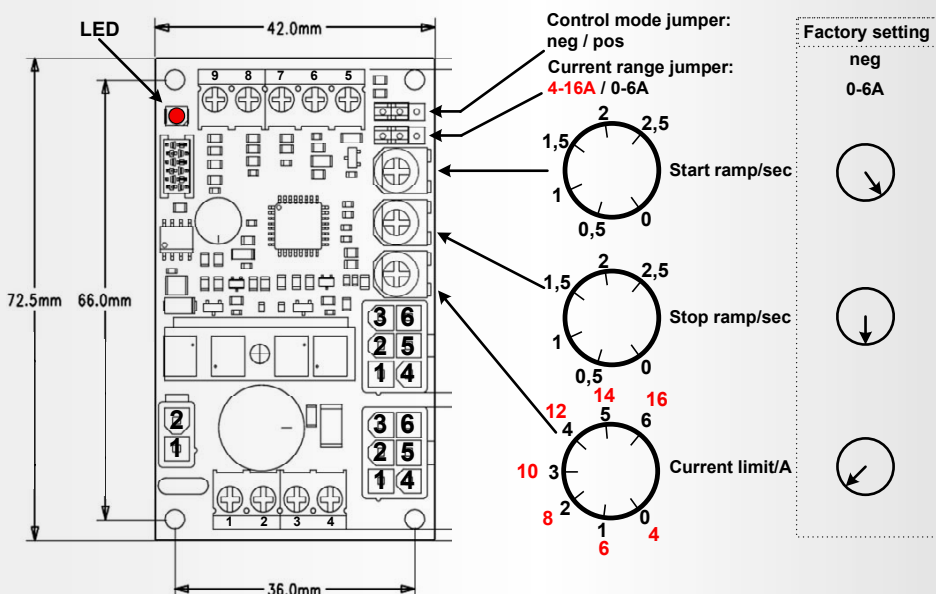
SETTINGS AND MECHANICAL DIMENSIONS
